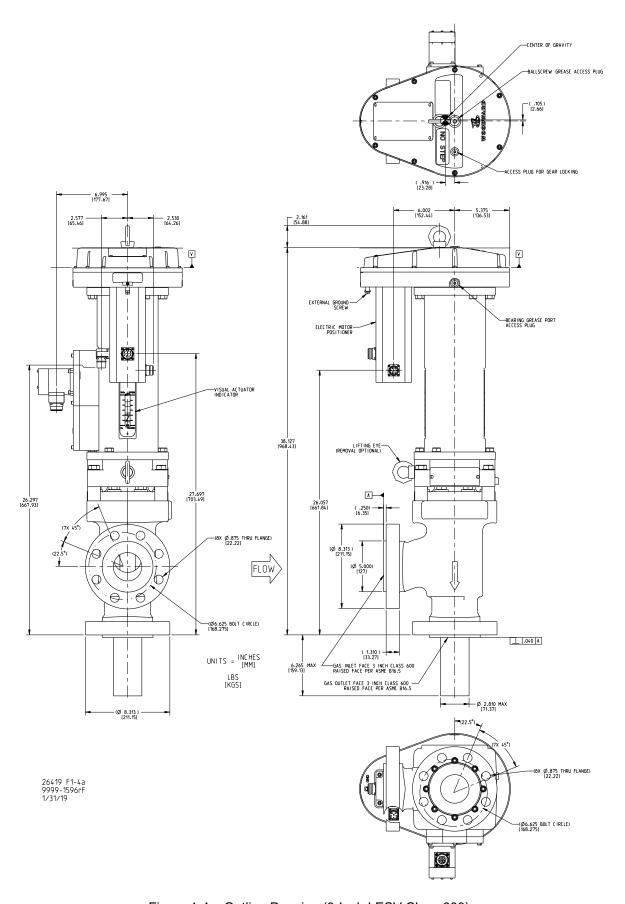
Outline Drawing (3-Inch LESV Class 600)
